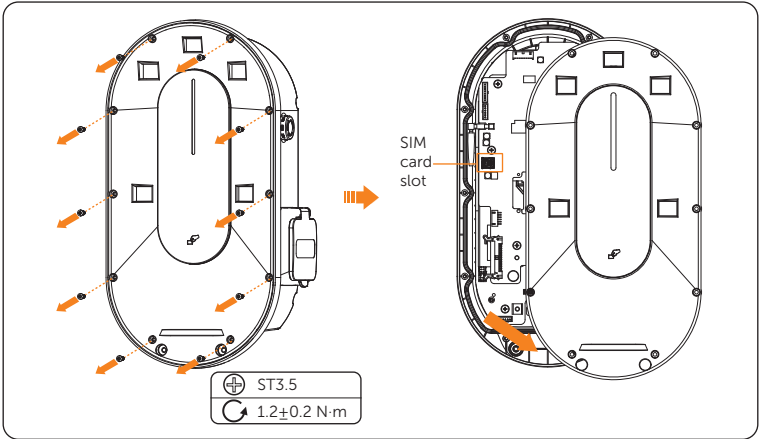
Remove the front panel cover and locate the SIM card slot
